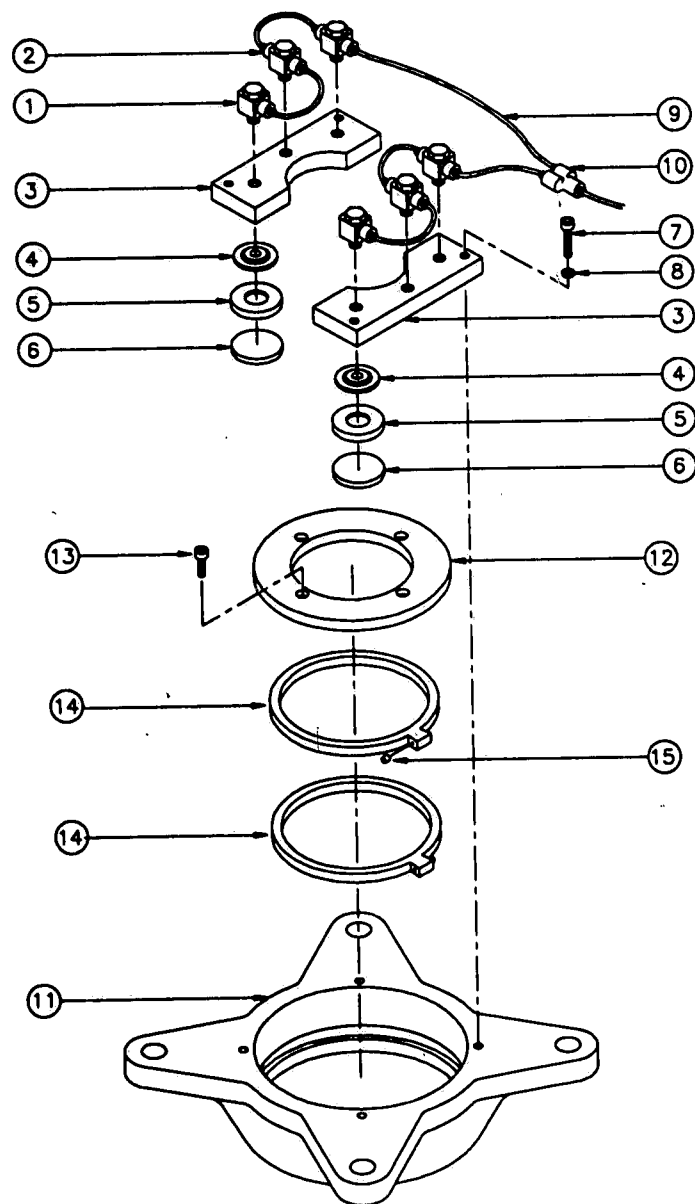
Rotational Stop and Air Brake Assembly, Bearing Plate — Models 905M and 250M
